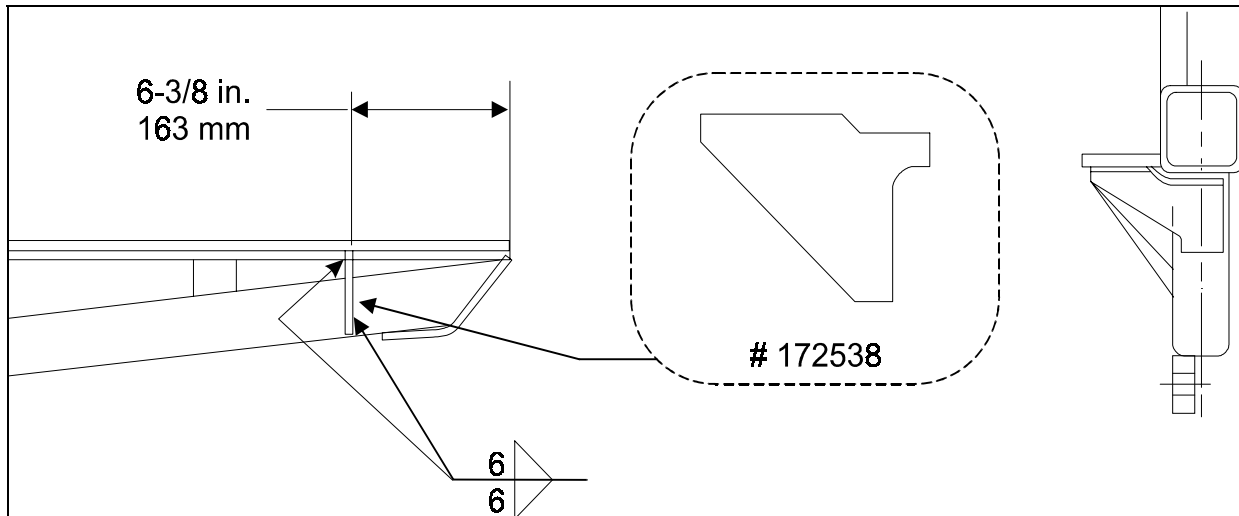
WELDING OF REINFORCEMENT BRACKETS ON H3-45 VIP ENGINE CRADLE BED (SAME FOR BOTH SIDES)
